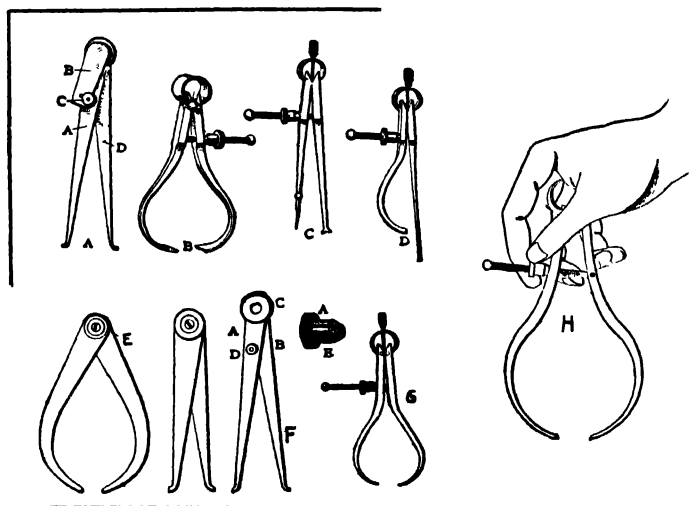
Common Forms of Inside and Outside Caliper Useful for Taking and Transferring Measurements.
